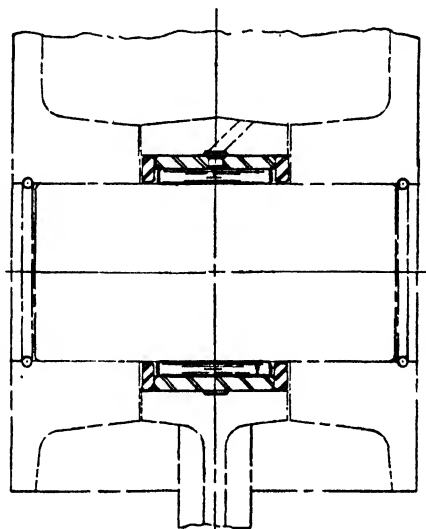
NEEDLE BEARING ON PISTON PIN.
